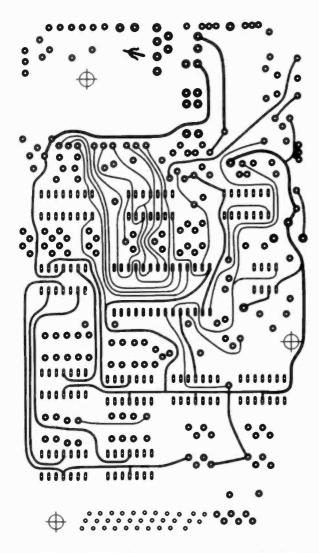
FOIL PATTERN of component side of double-sided clock board. Actual board measures 7 × 4 inches.
